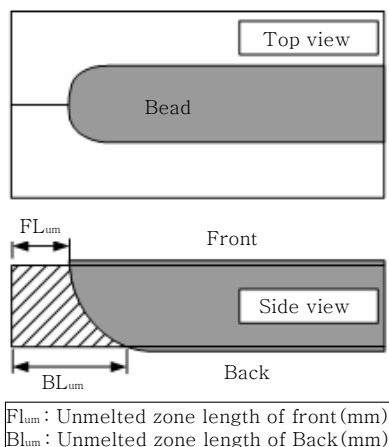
Definition of unmelted zone length of front and back side of weldment
